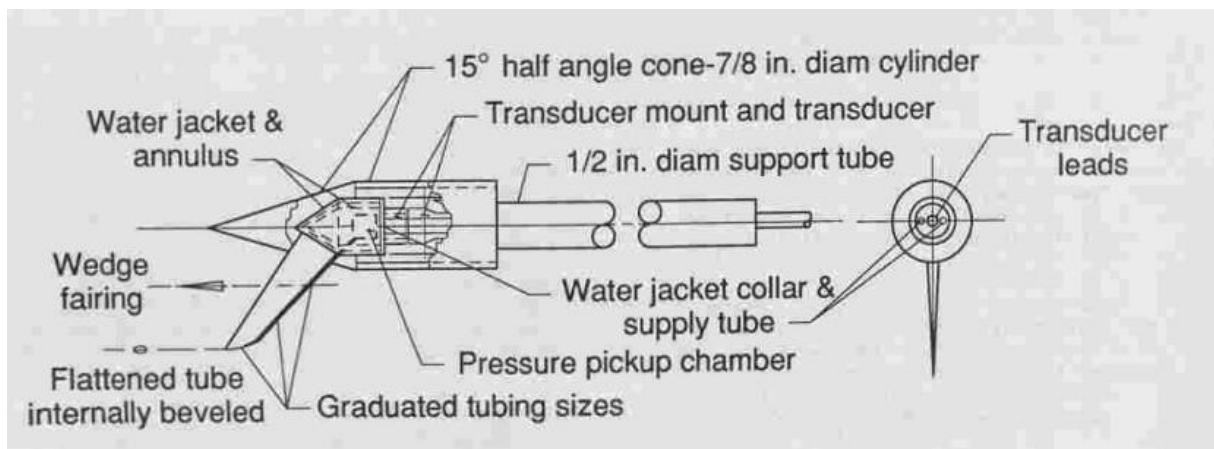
A schematic of the assembled pitot probe and mount [3].
